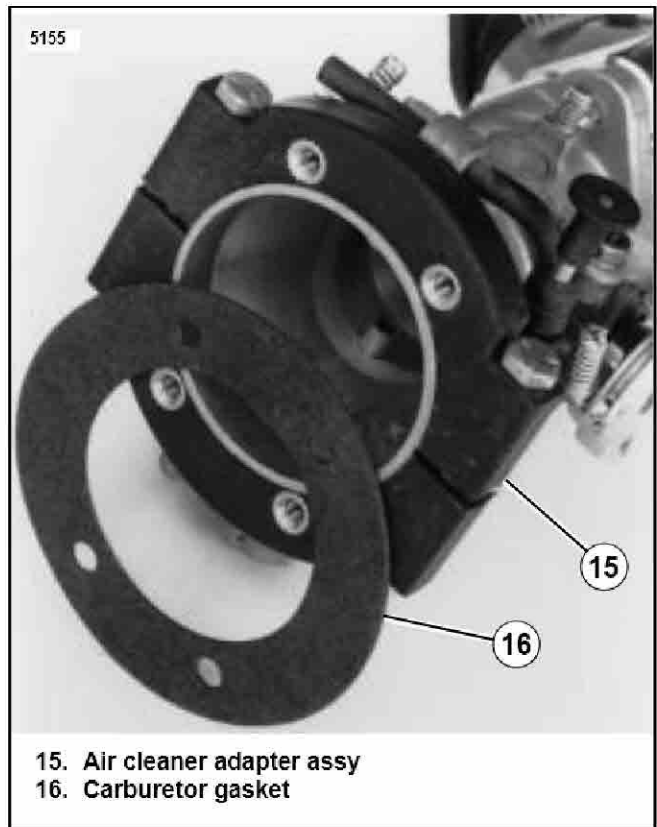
Air Cleaner Adapter and Carburetor Gasket
